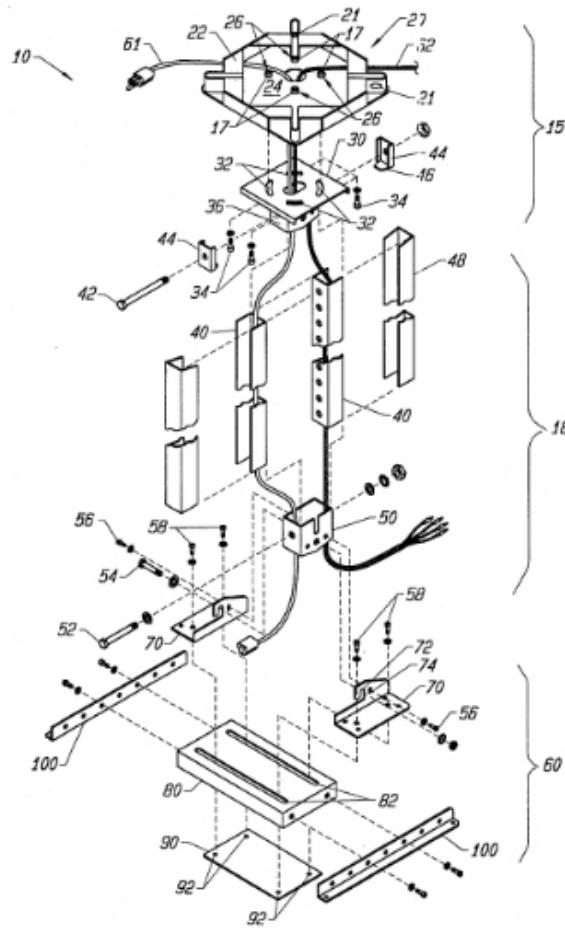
Exploded view of the mount described in patent US5490655A [22]
